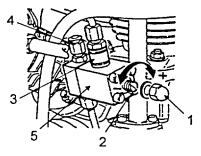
COMPRESSOR OIL PRESSURE REGULATOR
